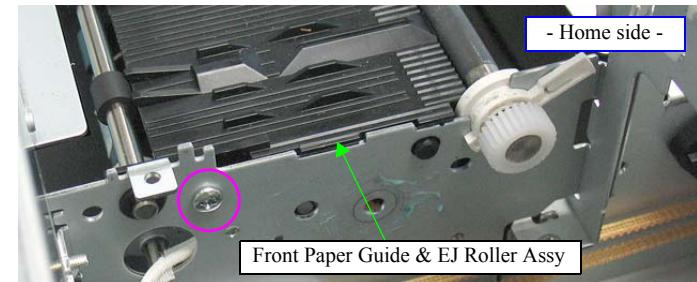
Removing the Front Paper Guide & EJ Roller Assy (3)
